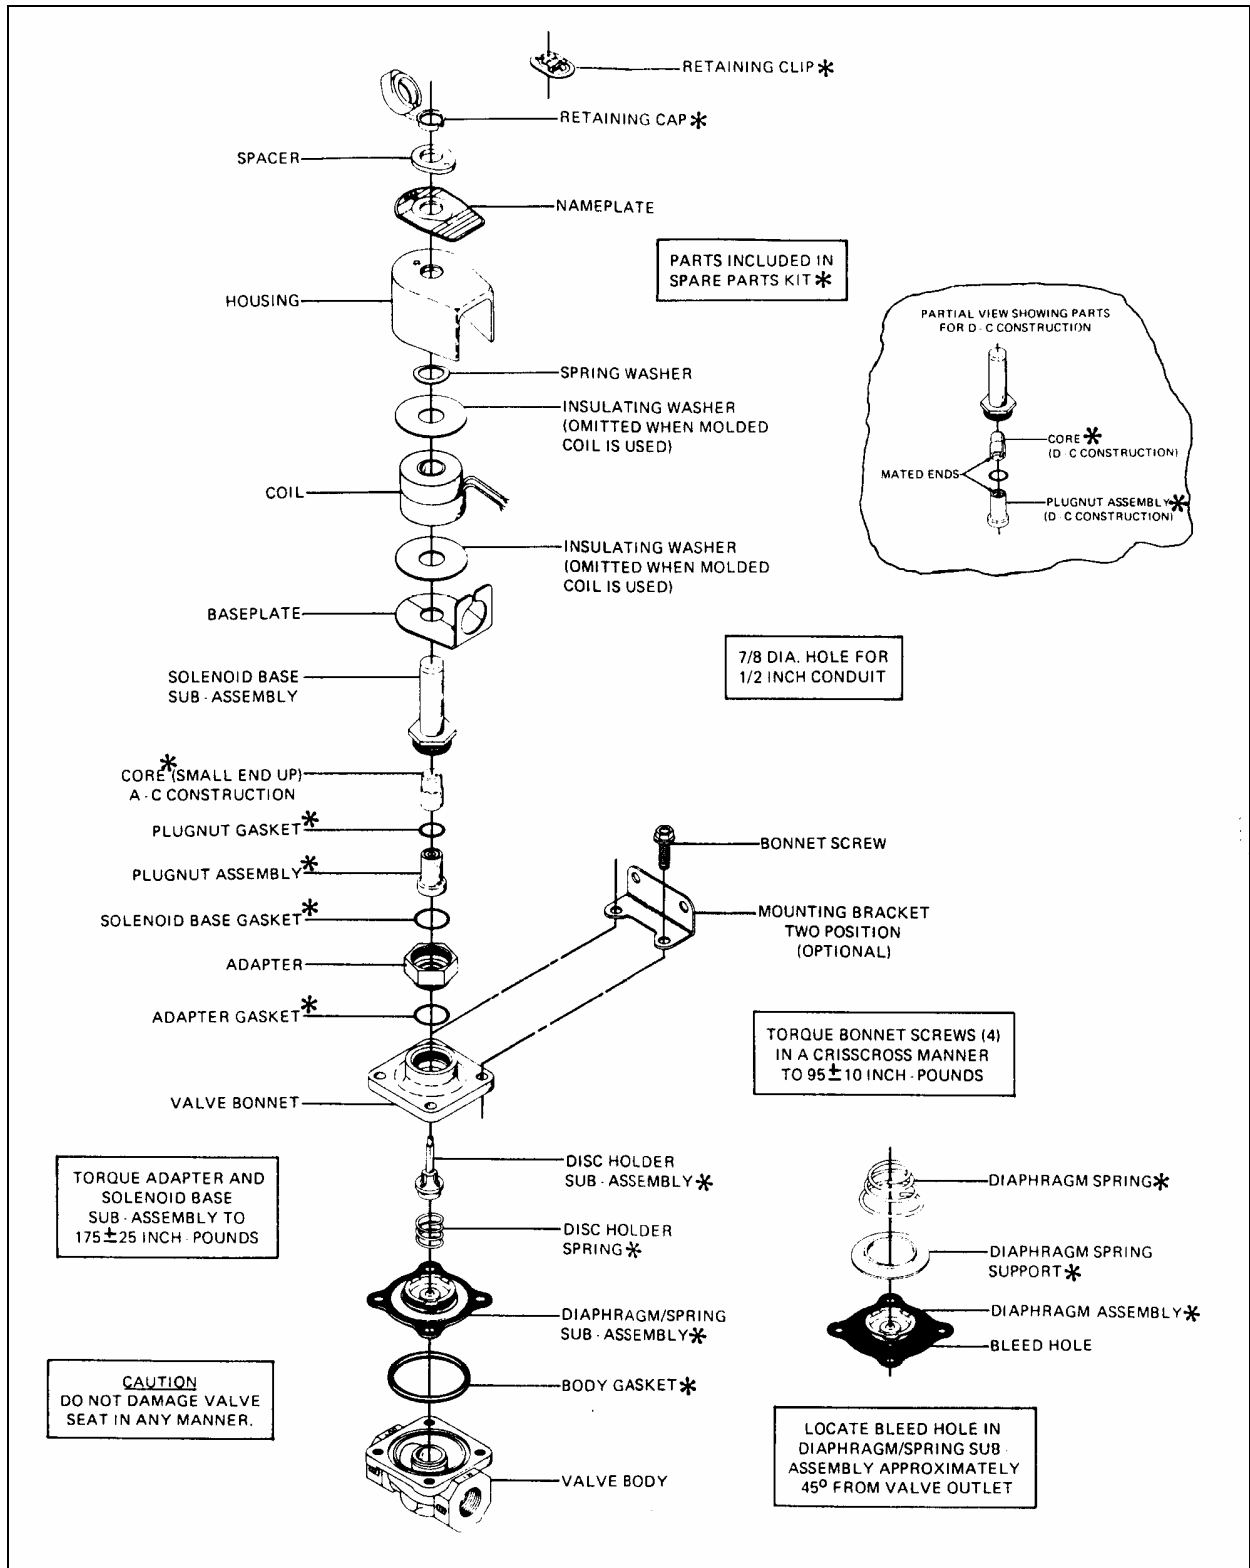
DRIVER'S WATER SOLENOID VALVE
